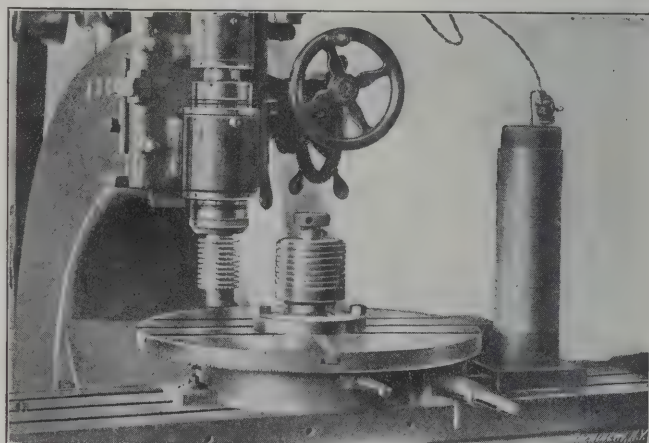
Cutting out Piston Rings in the Vertical Milling Machine
